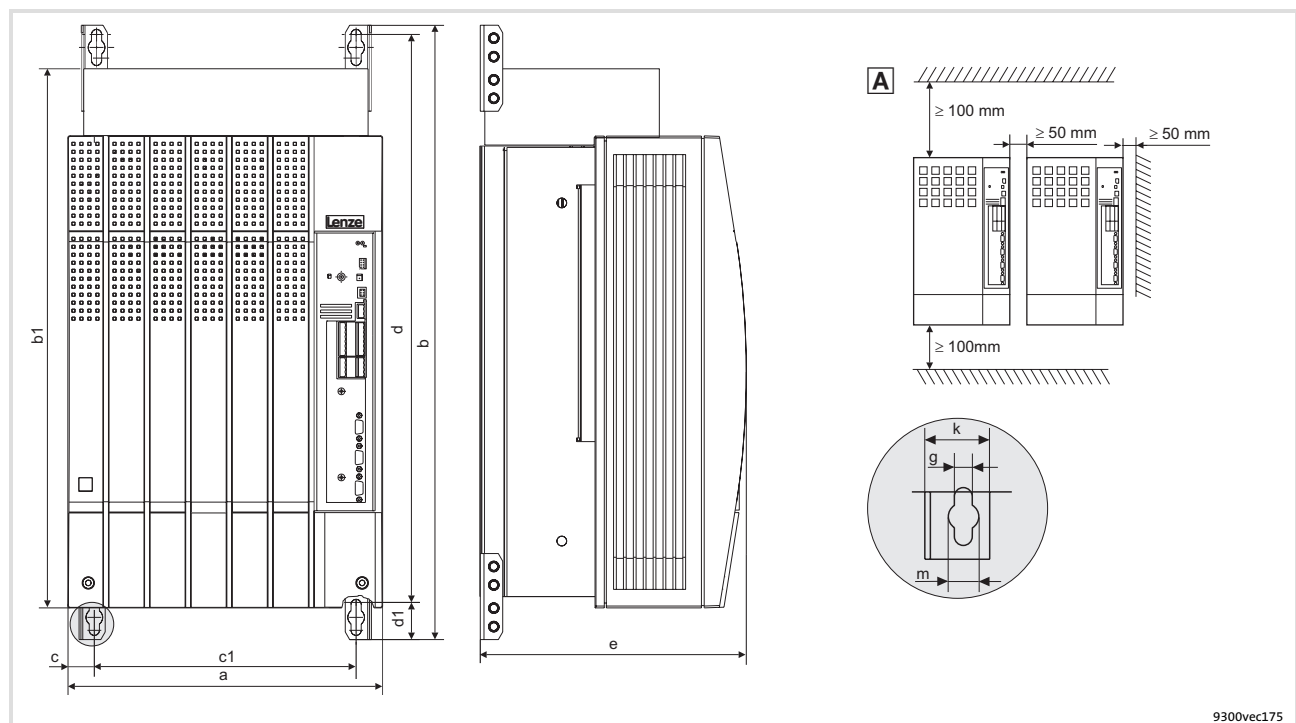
Standard mounting with fixing brackets 55 kW
